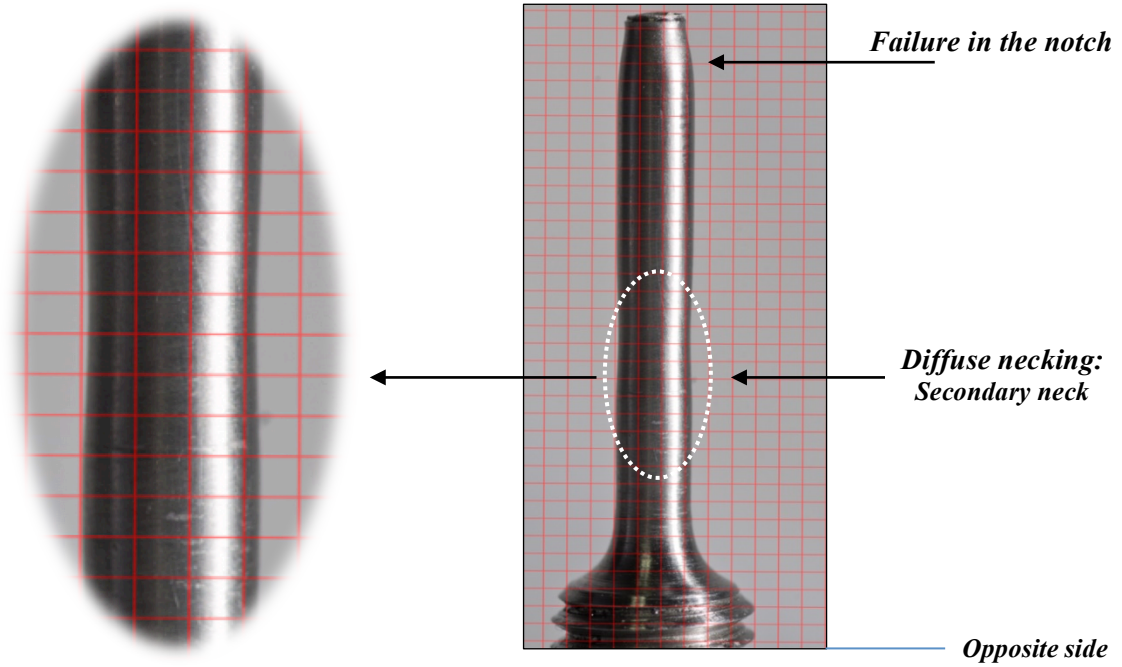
Post mortem observation. Specimen 14. Fracture in the notch and secondary (diffuse) neck in the opposite side.
